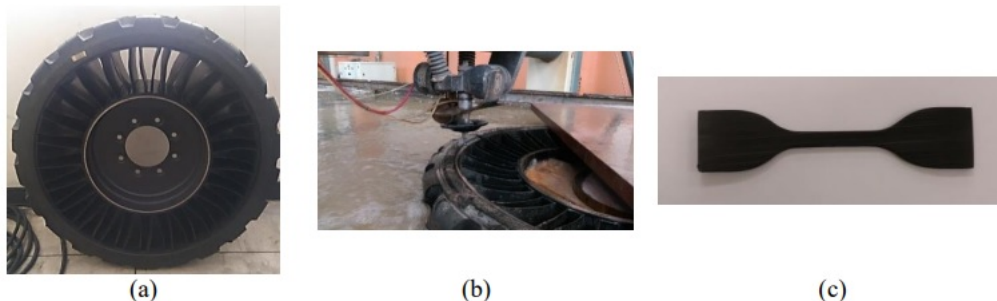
a) TWEEL NPT, b) the extraction of spokes using waterjet cutting technique, and c) a waterjet cut specimen [22]
